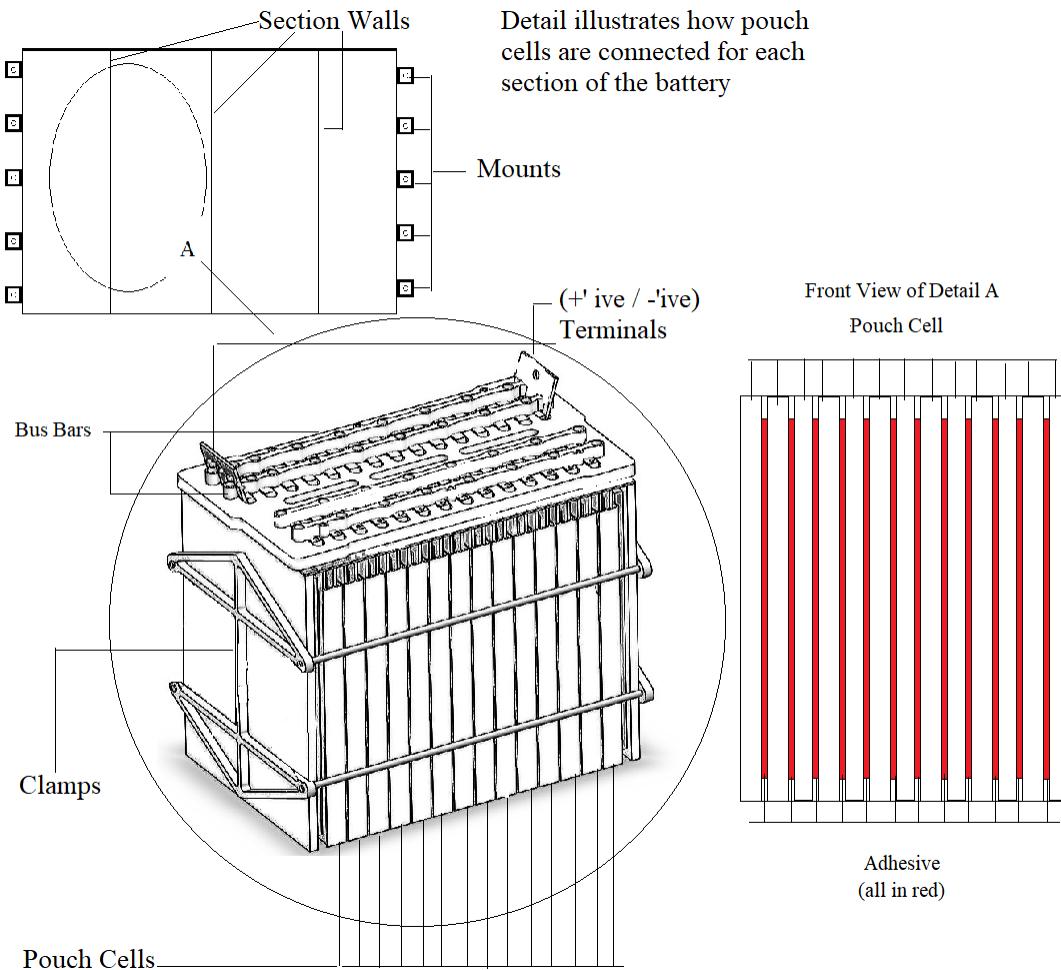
Top View of a Battery case with detail views for sections made up of pouch cells [17] [18] [19]
